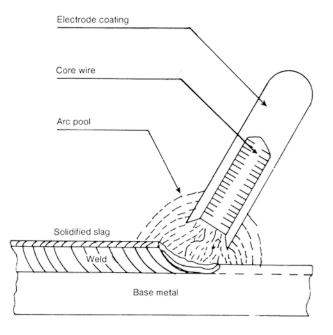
SHIELDED METAL ARC WELDING PROCESS
